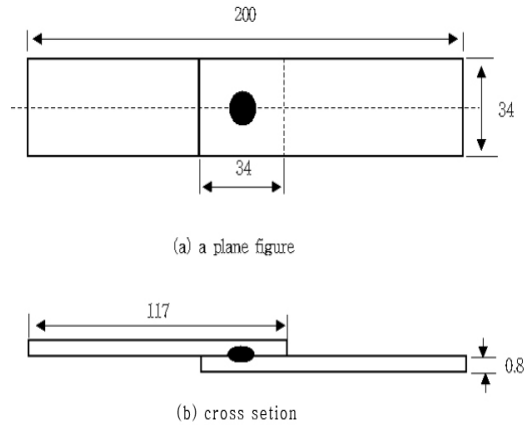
Electrode resistance spot welding specimen (unit : mm)
